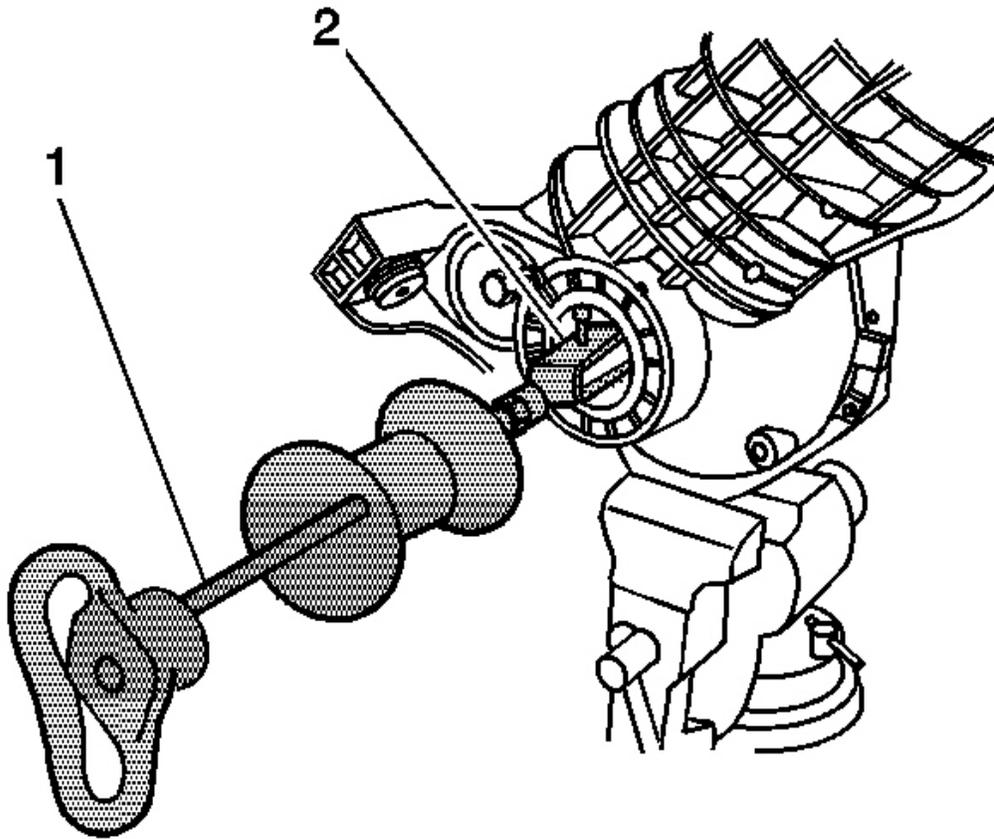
Installing J 29369-2 Behind Inner Axle Shaft Seal Or Inner Axle Shaft Bearing
